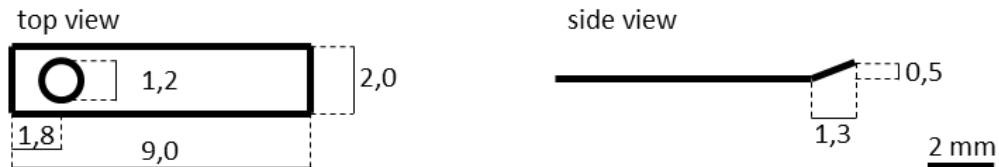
Technical drawings for the thermocontact holder at the manipulator.
